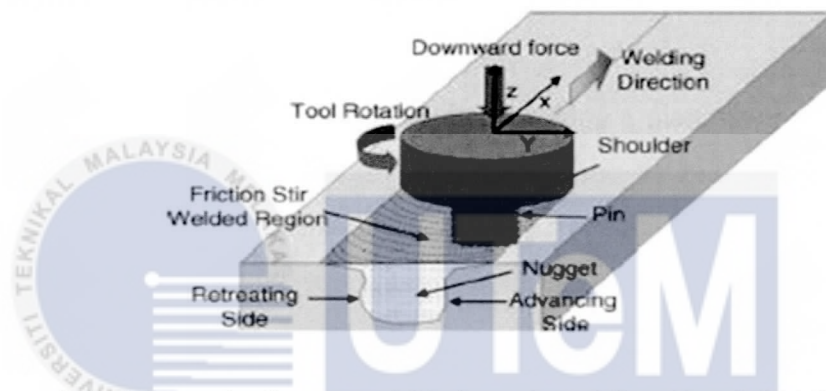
Schematic diagram of friction stir welding (Sued, 2015).
